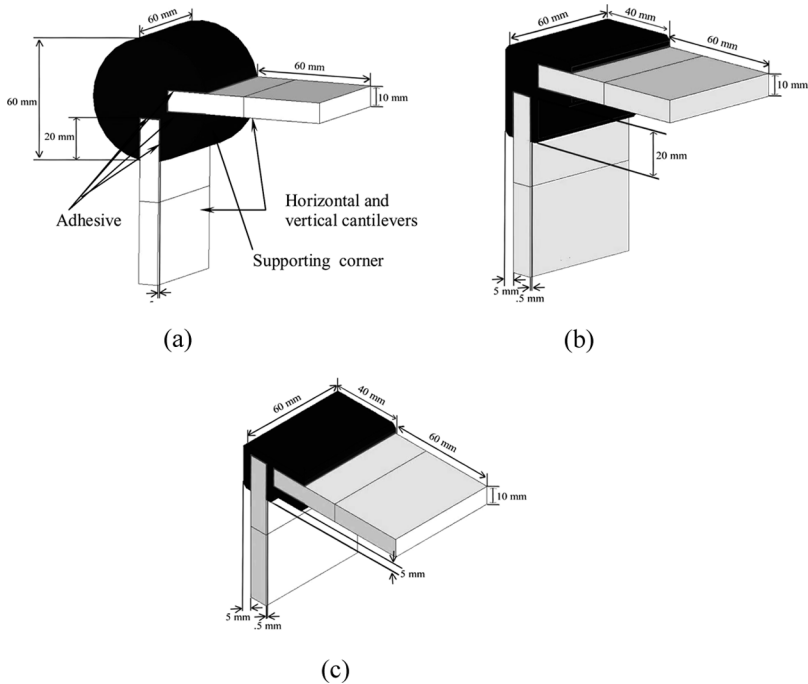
General layout and dimensions of right angle double containment joints. a) Circular cross-section right angle support, b) regular right angle support, and c) modified right angle support.
